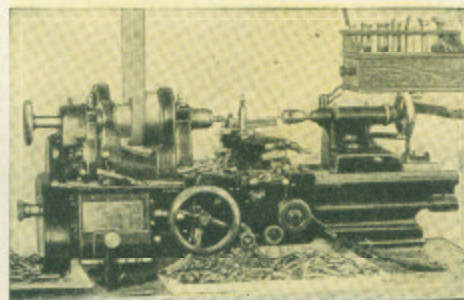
9-inch Quick Change Gear Bench Lathe with Hand Wheel Draw-in Collet Chuck
